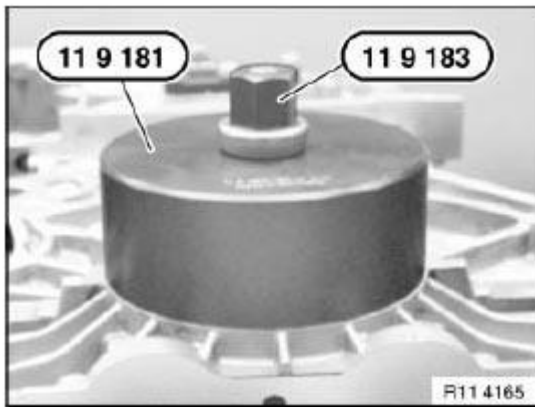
Identifying Special Tools (11 9 181) And (11 9 183)
